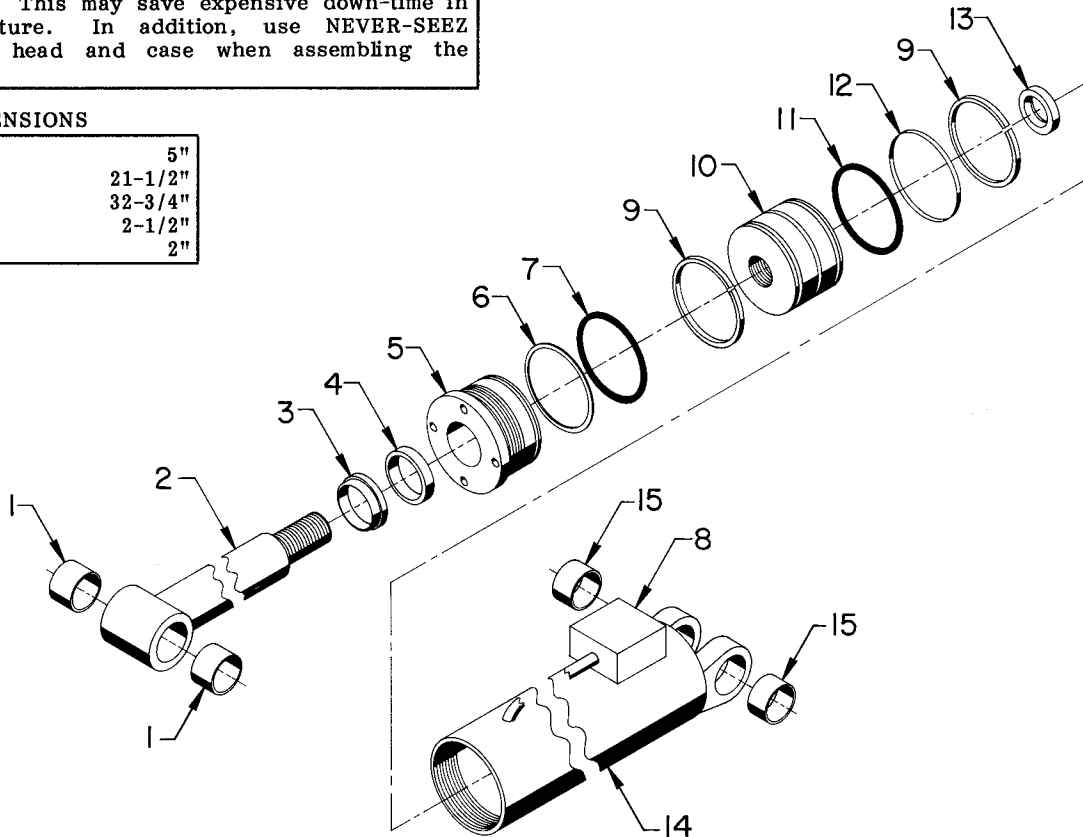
Outer Boom — 1 Hydraulic/1 Manual
